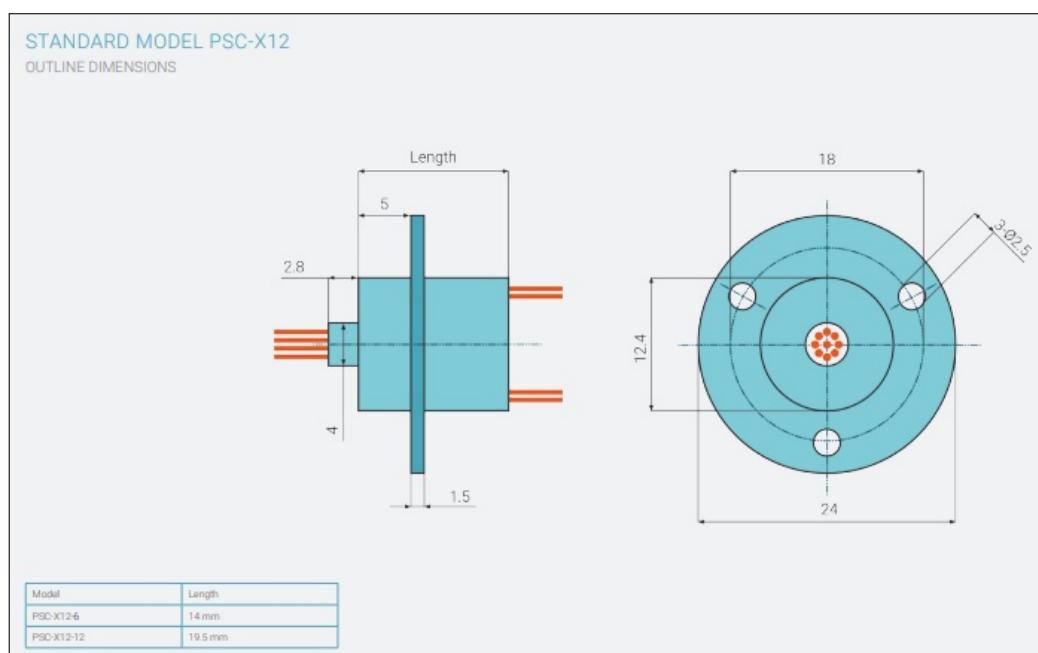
PSC-X12 SERIES slip ring dimensions (*PSC-X12-Technical-Information* 2019).
